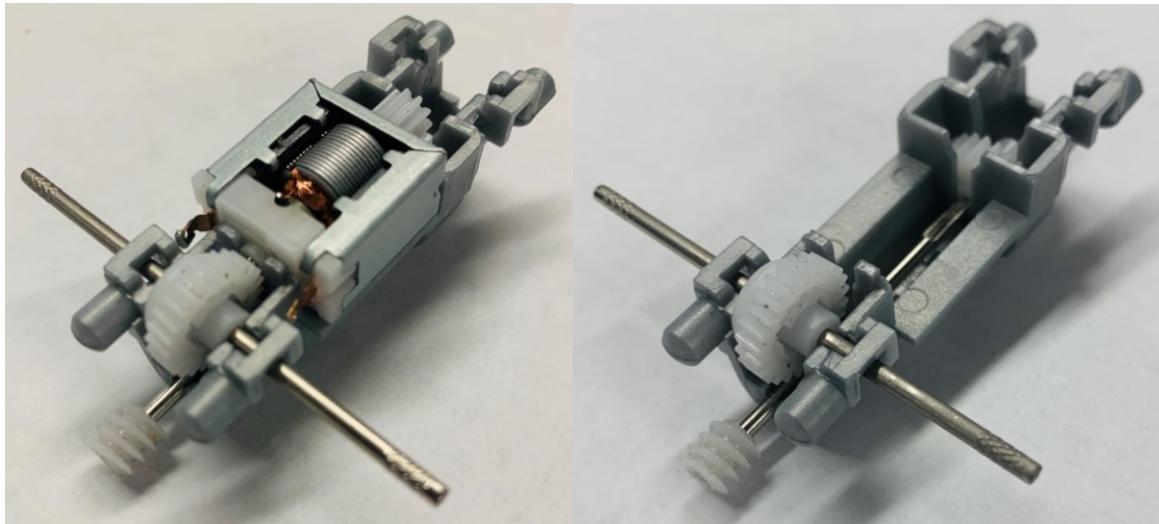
Actual Power Transmission Assembly with Rear Wheel Axle and Axle Gear attached, Worm Gear is pushed out for visualization (it should sit beneath the Axle Gear). Power assembly translates power (left) to this system.
